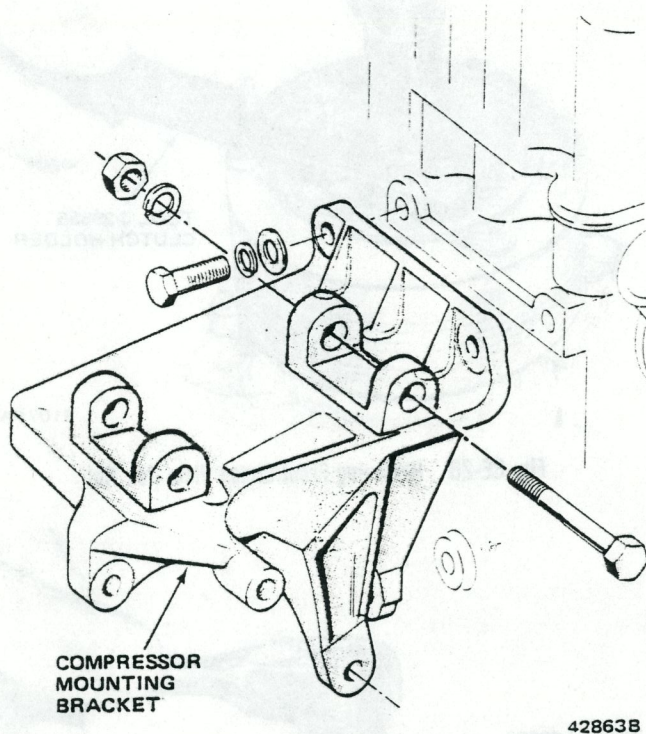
E-25 Compressor Mounting—California Six-Cylinder Engine
